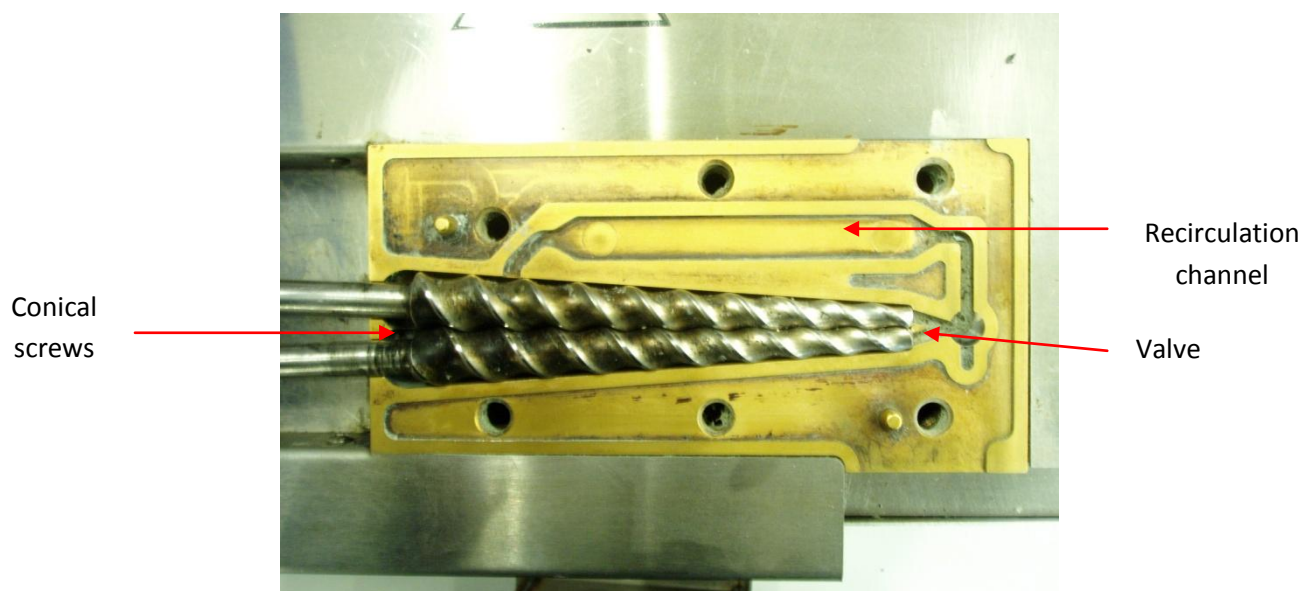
Details of HAAKE Minilab screw arrangement.
